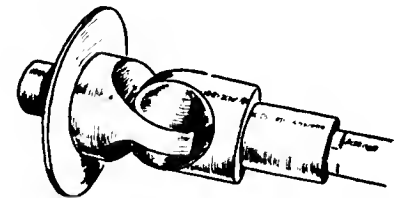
Peculiar bell shaped universal used on British Rover cars
